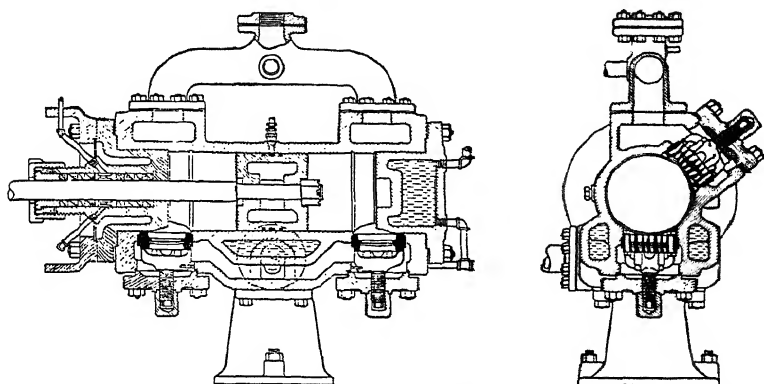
Cross-sections of high-speed horizontal ammonia compressor with strip-plate valves.
